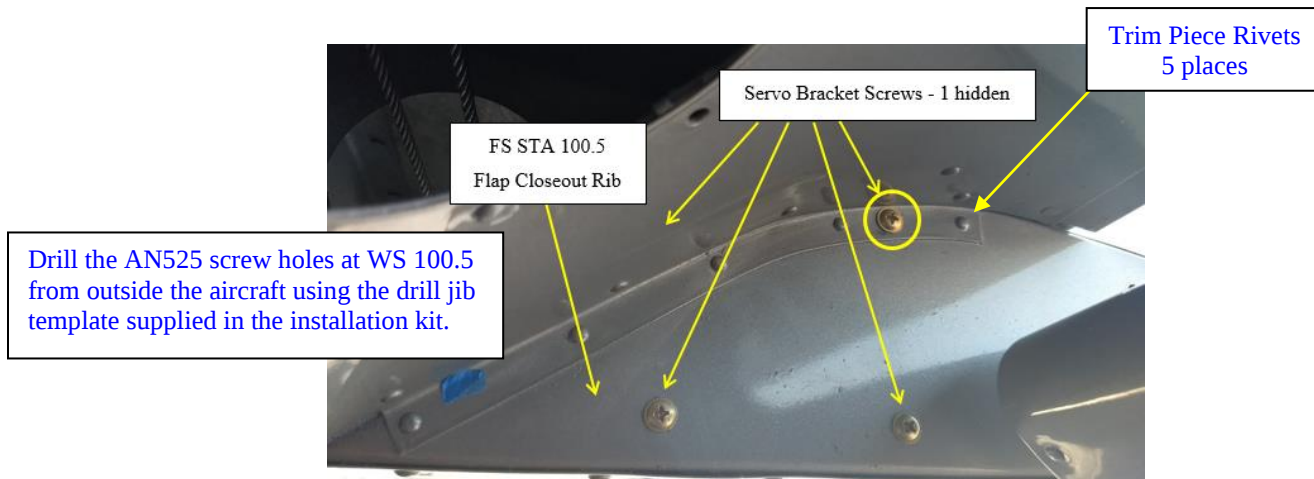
ROLL SERVO & MOUNTING PLATE INSTALLATION
